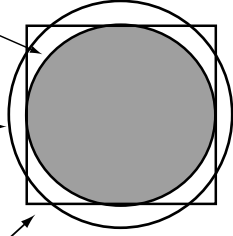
Footprint - 5 mils stencil - non solder mask defined
